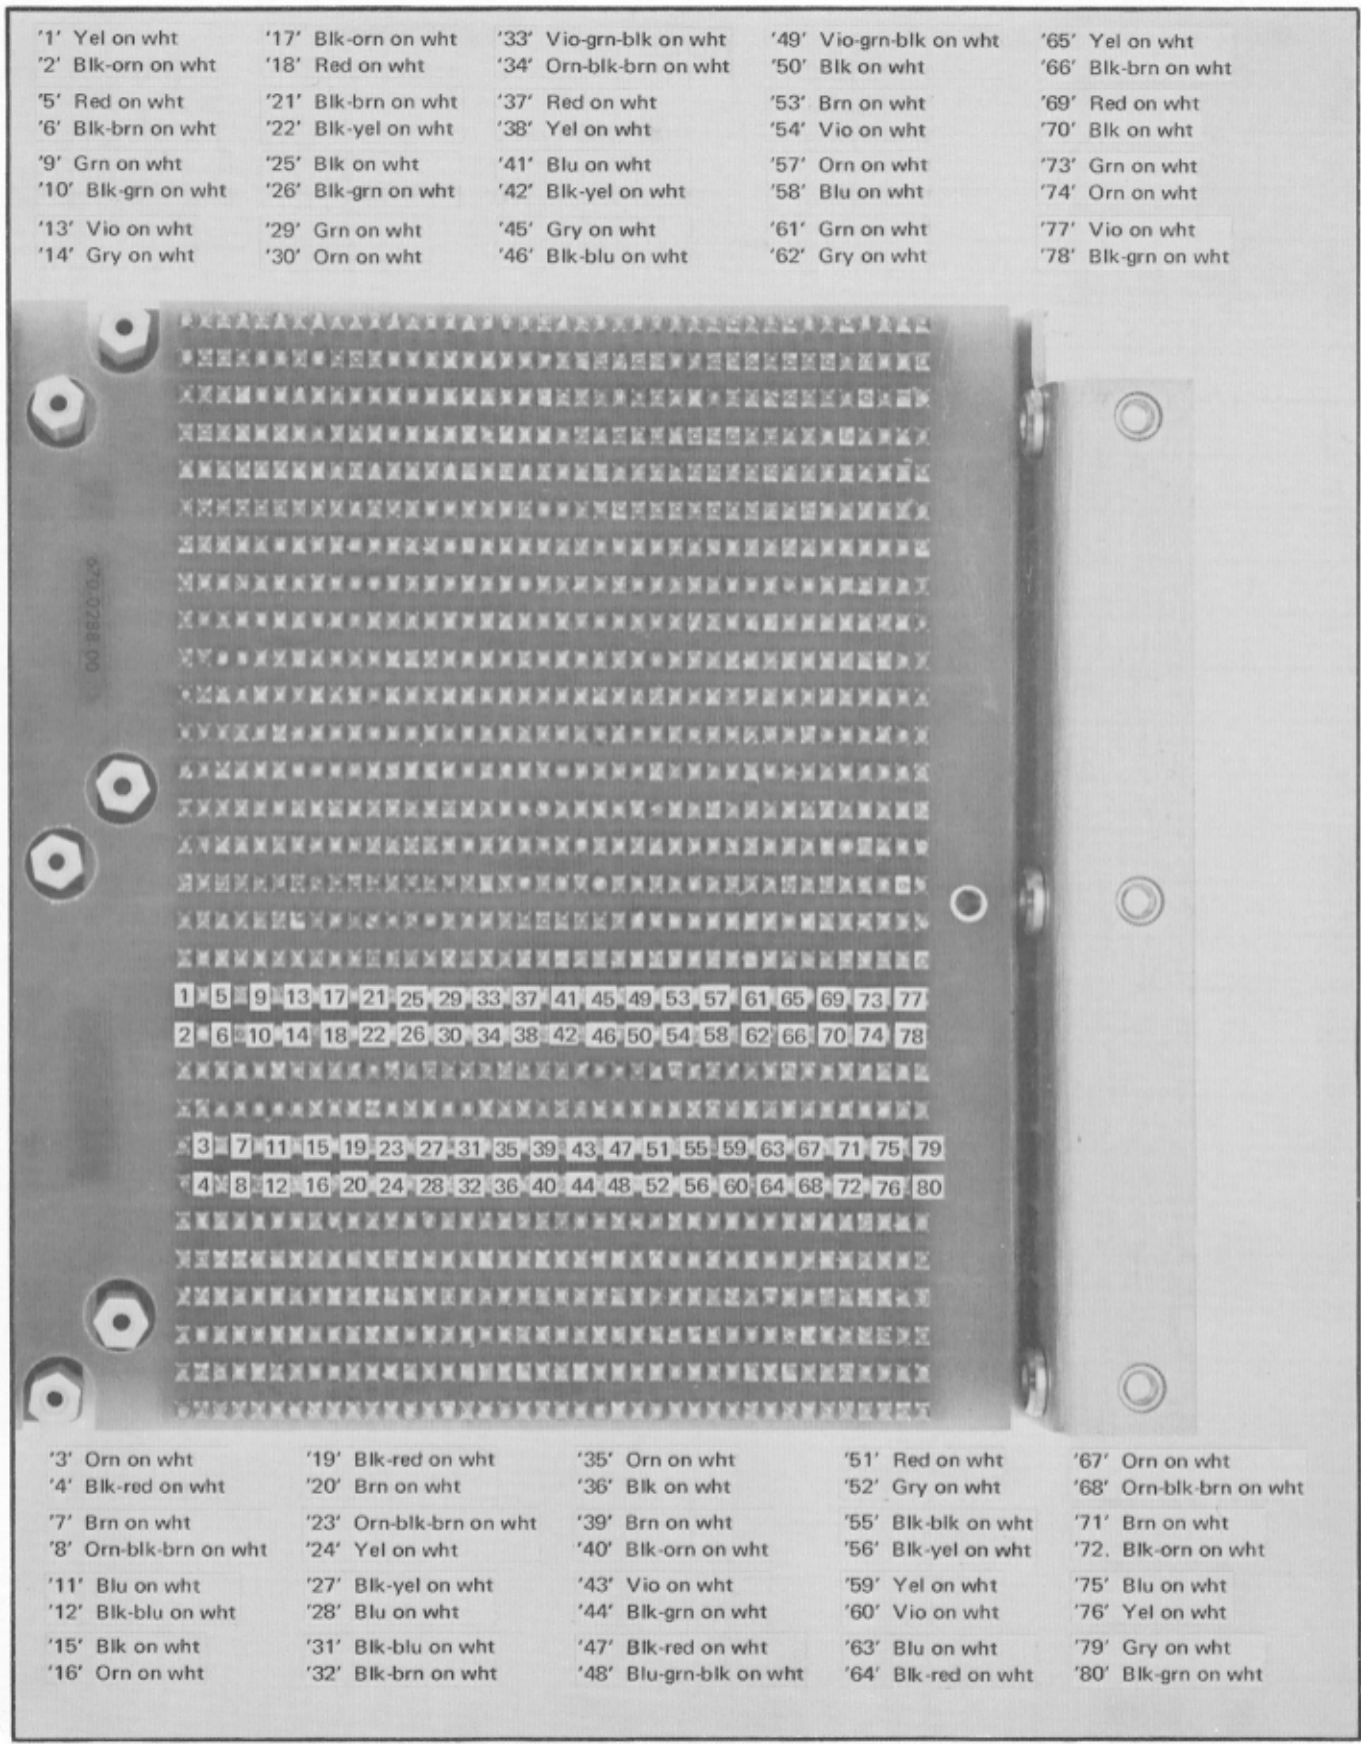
Right side of Interconnector circuit board (as viewed from the rear) showing wiring color code.
